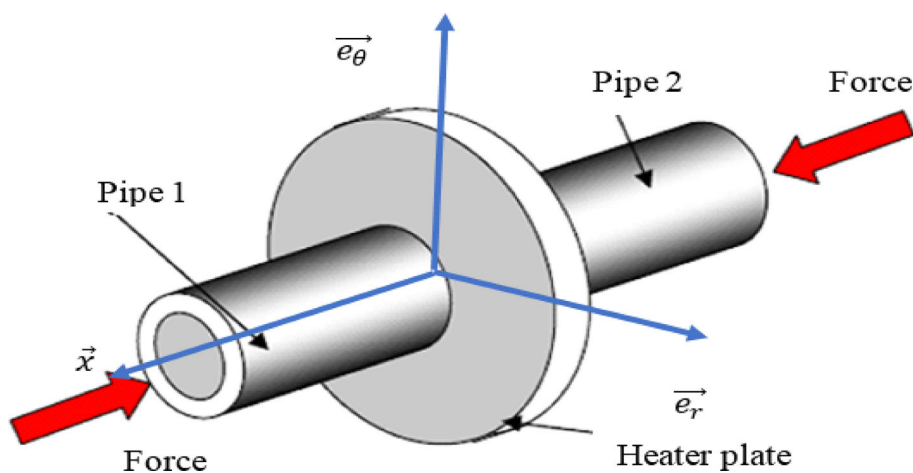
Graphic illustration of the pipe heating phase during butt welding.
